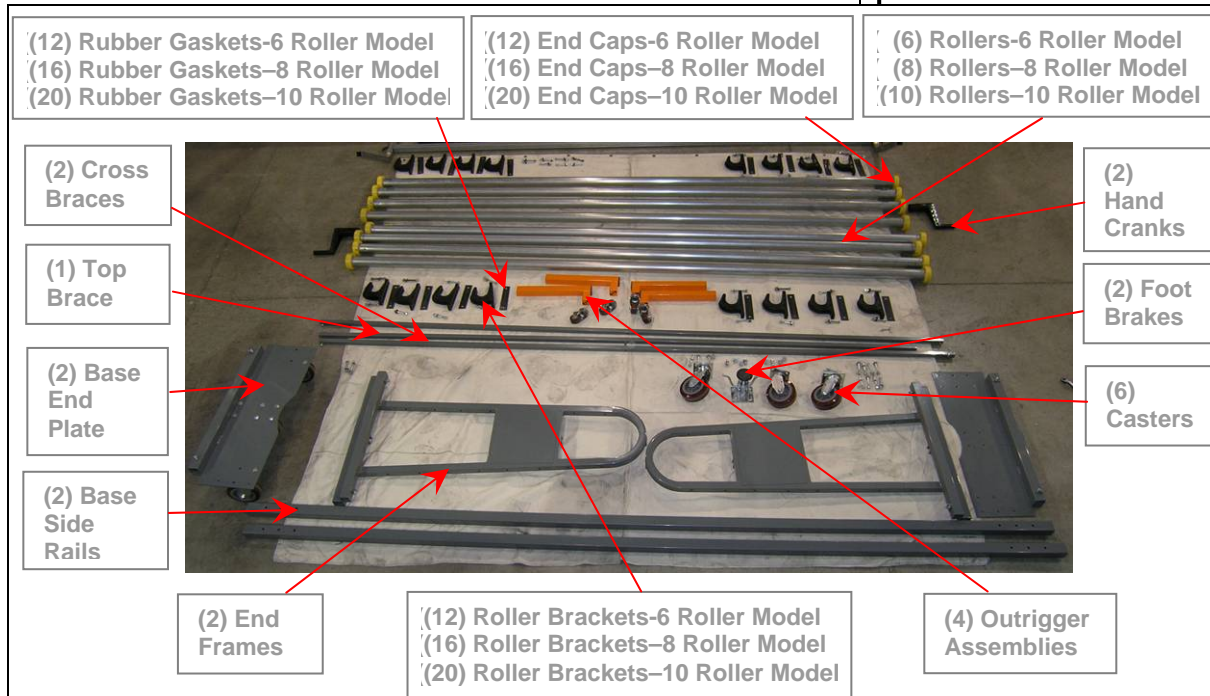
LAYOUT COMPONENTS ON FLOOR SIMILAR TO THE ABOVE ARRANGEMENT.
